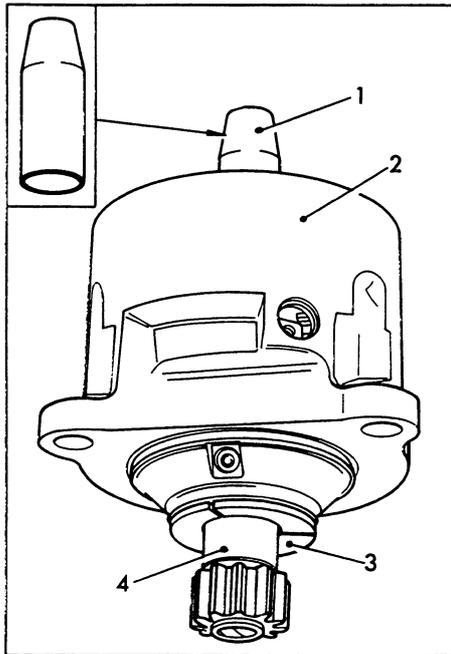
Method of fitting split collar tool, Part No. 6244-43.
